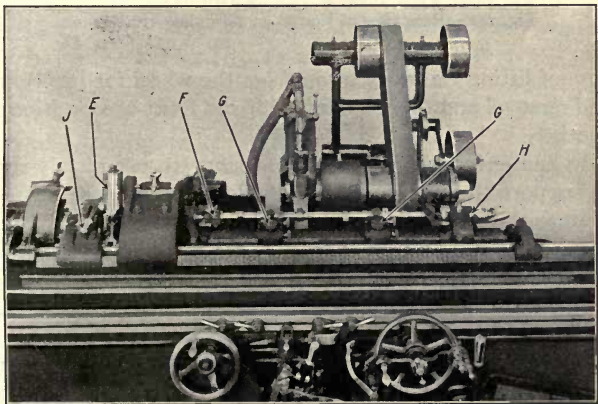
Norton grinding attachment for finishing cams made integral with their shafts.
